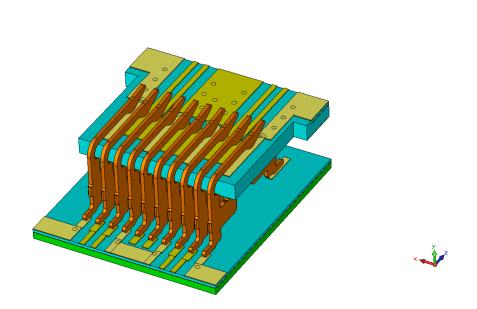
MECT connector with mated host and module printed circuit boards. $(Host\ PCB\ side\ view)$
